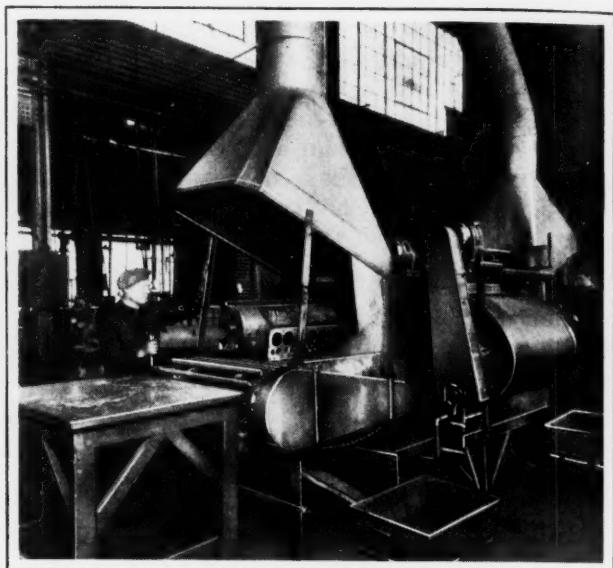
A Washing Machine Used for Cleaning Large Automobile Parts
